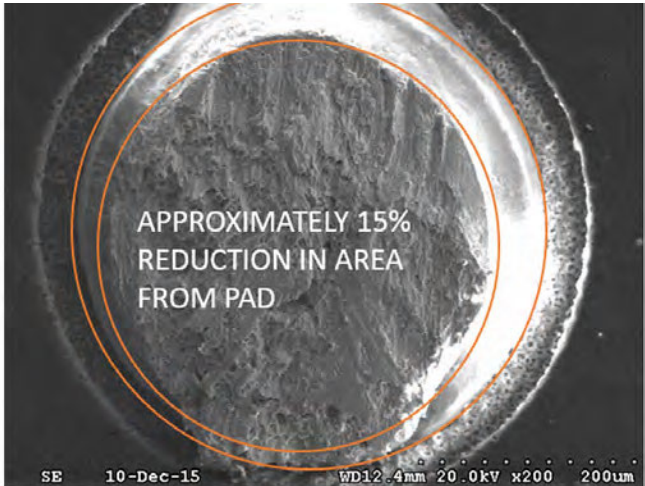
Shear fracture surface of ENEPIG sample with ductile fracture surface.
